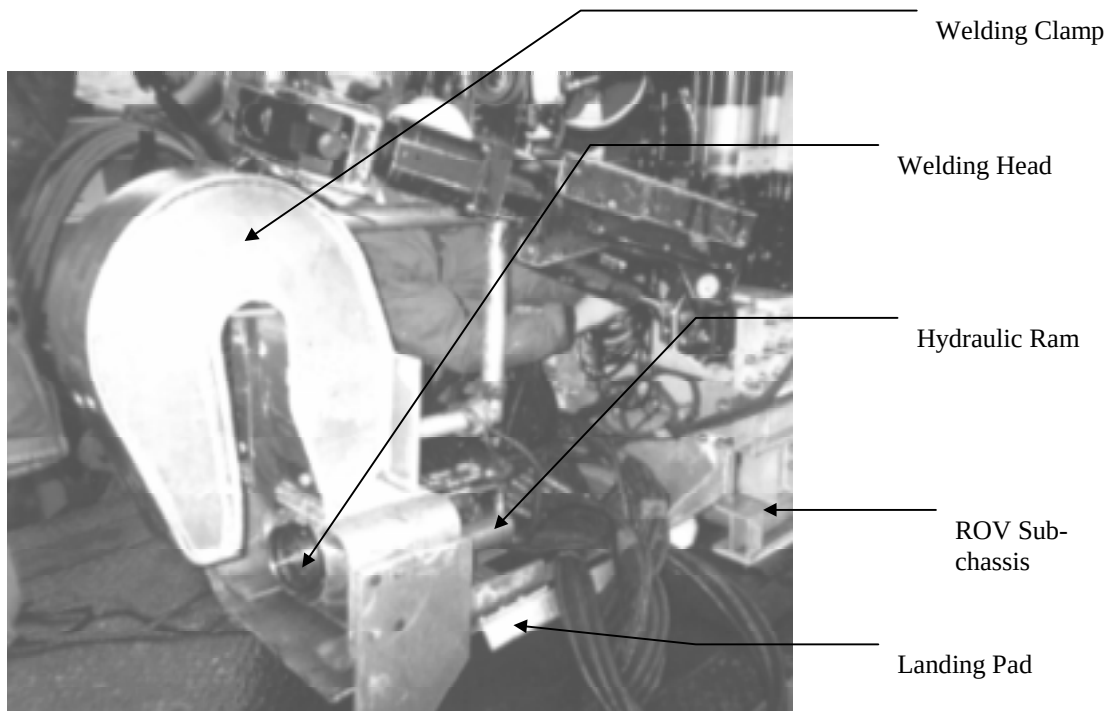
ROV Sub-chassis and Welding Equipment
